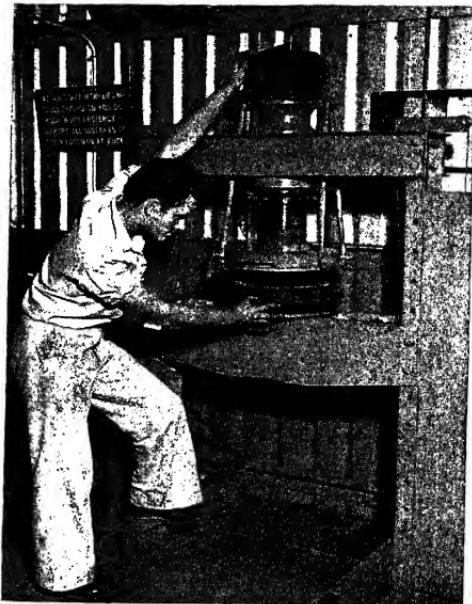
Hydraulic press to straighten brake-drum flanges.
